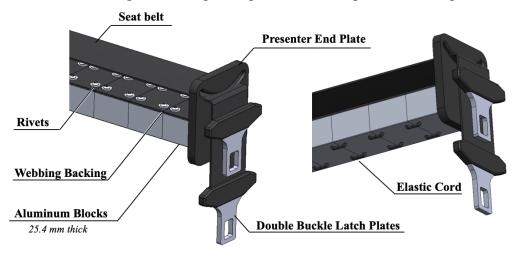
CAD schematic overview of drag chain with presenter end plate.
